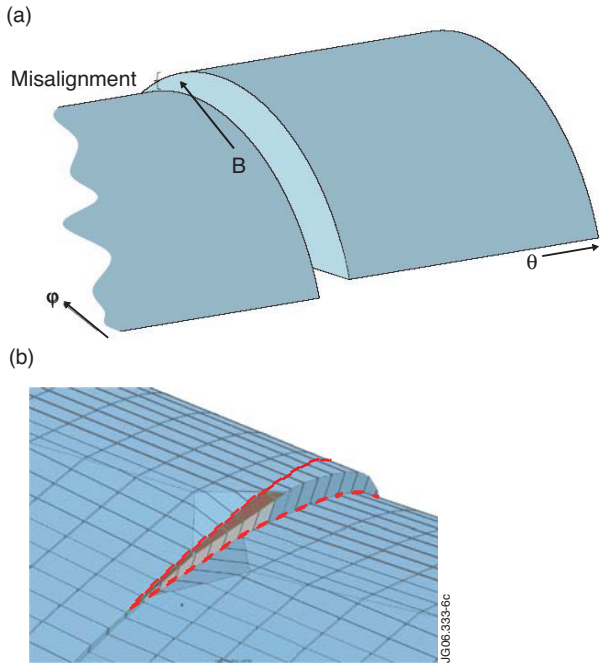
(a) gap and misalignment from assembly to assembly. (b) Lateral cuts to shadow poloidally facing surfaces exposed due to the gap from assembly to assembly (red line).
